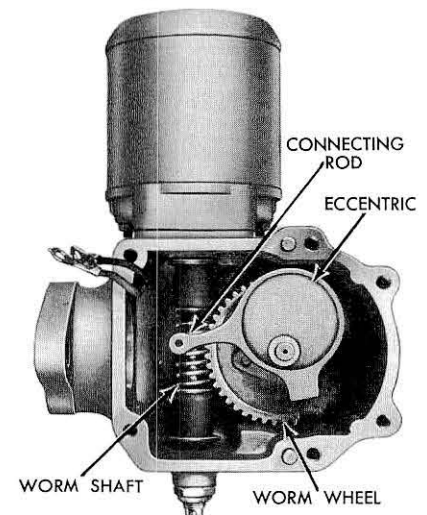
Electric Shift Unit—Assembled View—Neutral Position
